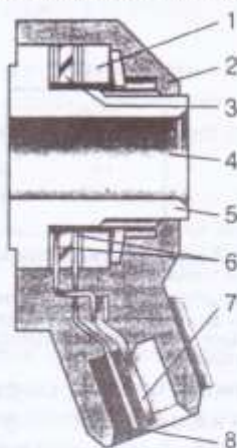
Cross-sectional diagram of a piezometric pressure converter for detonation combustion. It shows a complex assembly with a central piezoelectric ring (3) between two contact plates (6). A gravity mass (1) is used to press the ring against a sleeve (5). Electrical leads (7 and 8) are shown at the bottom.
